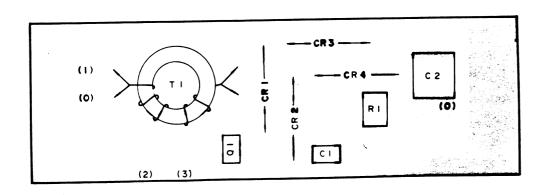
A52 Probe V-Channel Board Assembly Component Locations.
